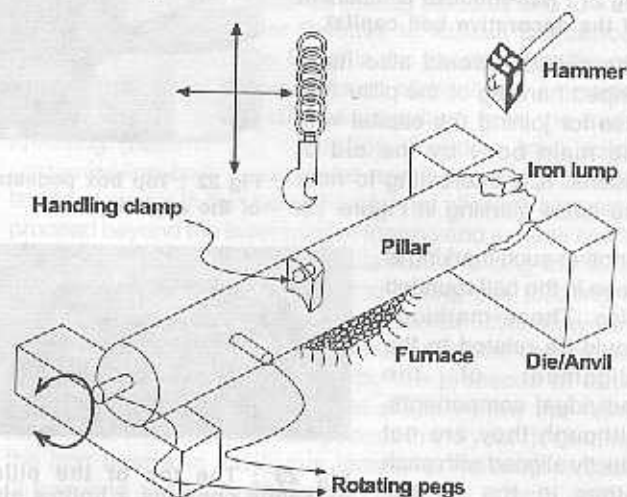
Horizontal forge welding technique for manufacturing the pillar's main body
